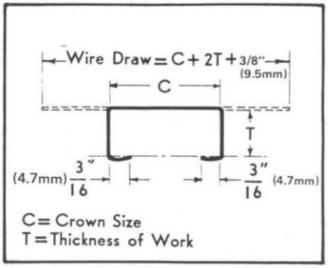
Wire Draw Dimensions and Formula for Crowns Greater than 1/2" (12.7mm)
